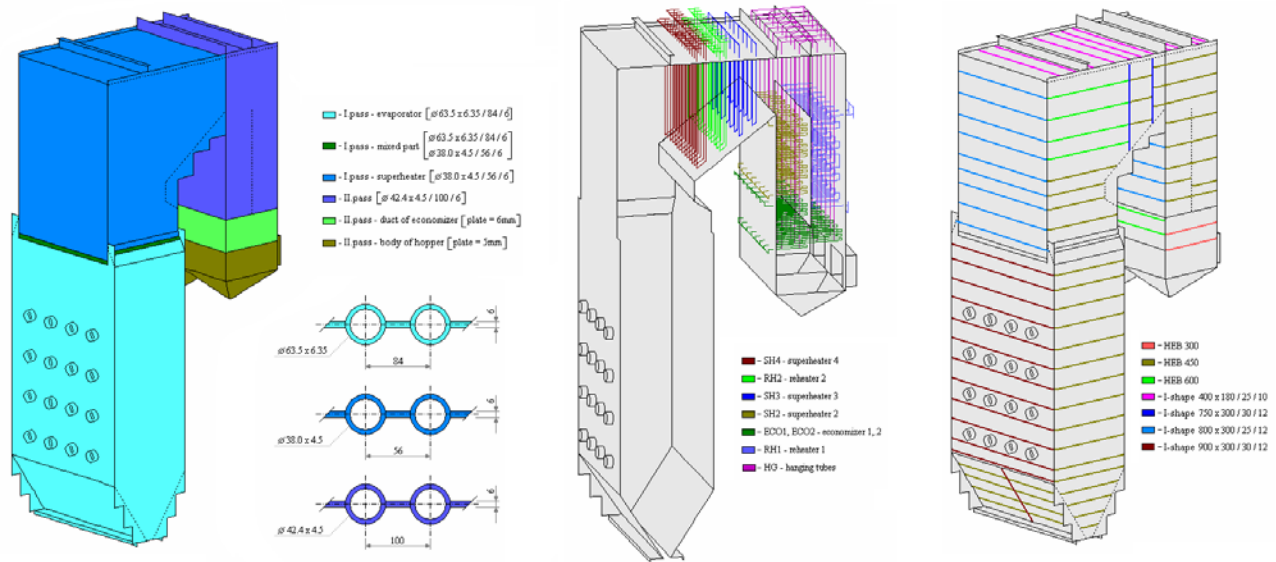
Boiler membrane structure with buckstays and convection heating tubes
